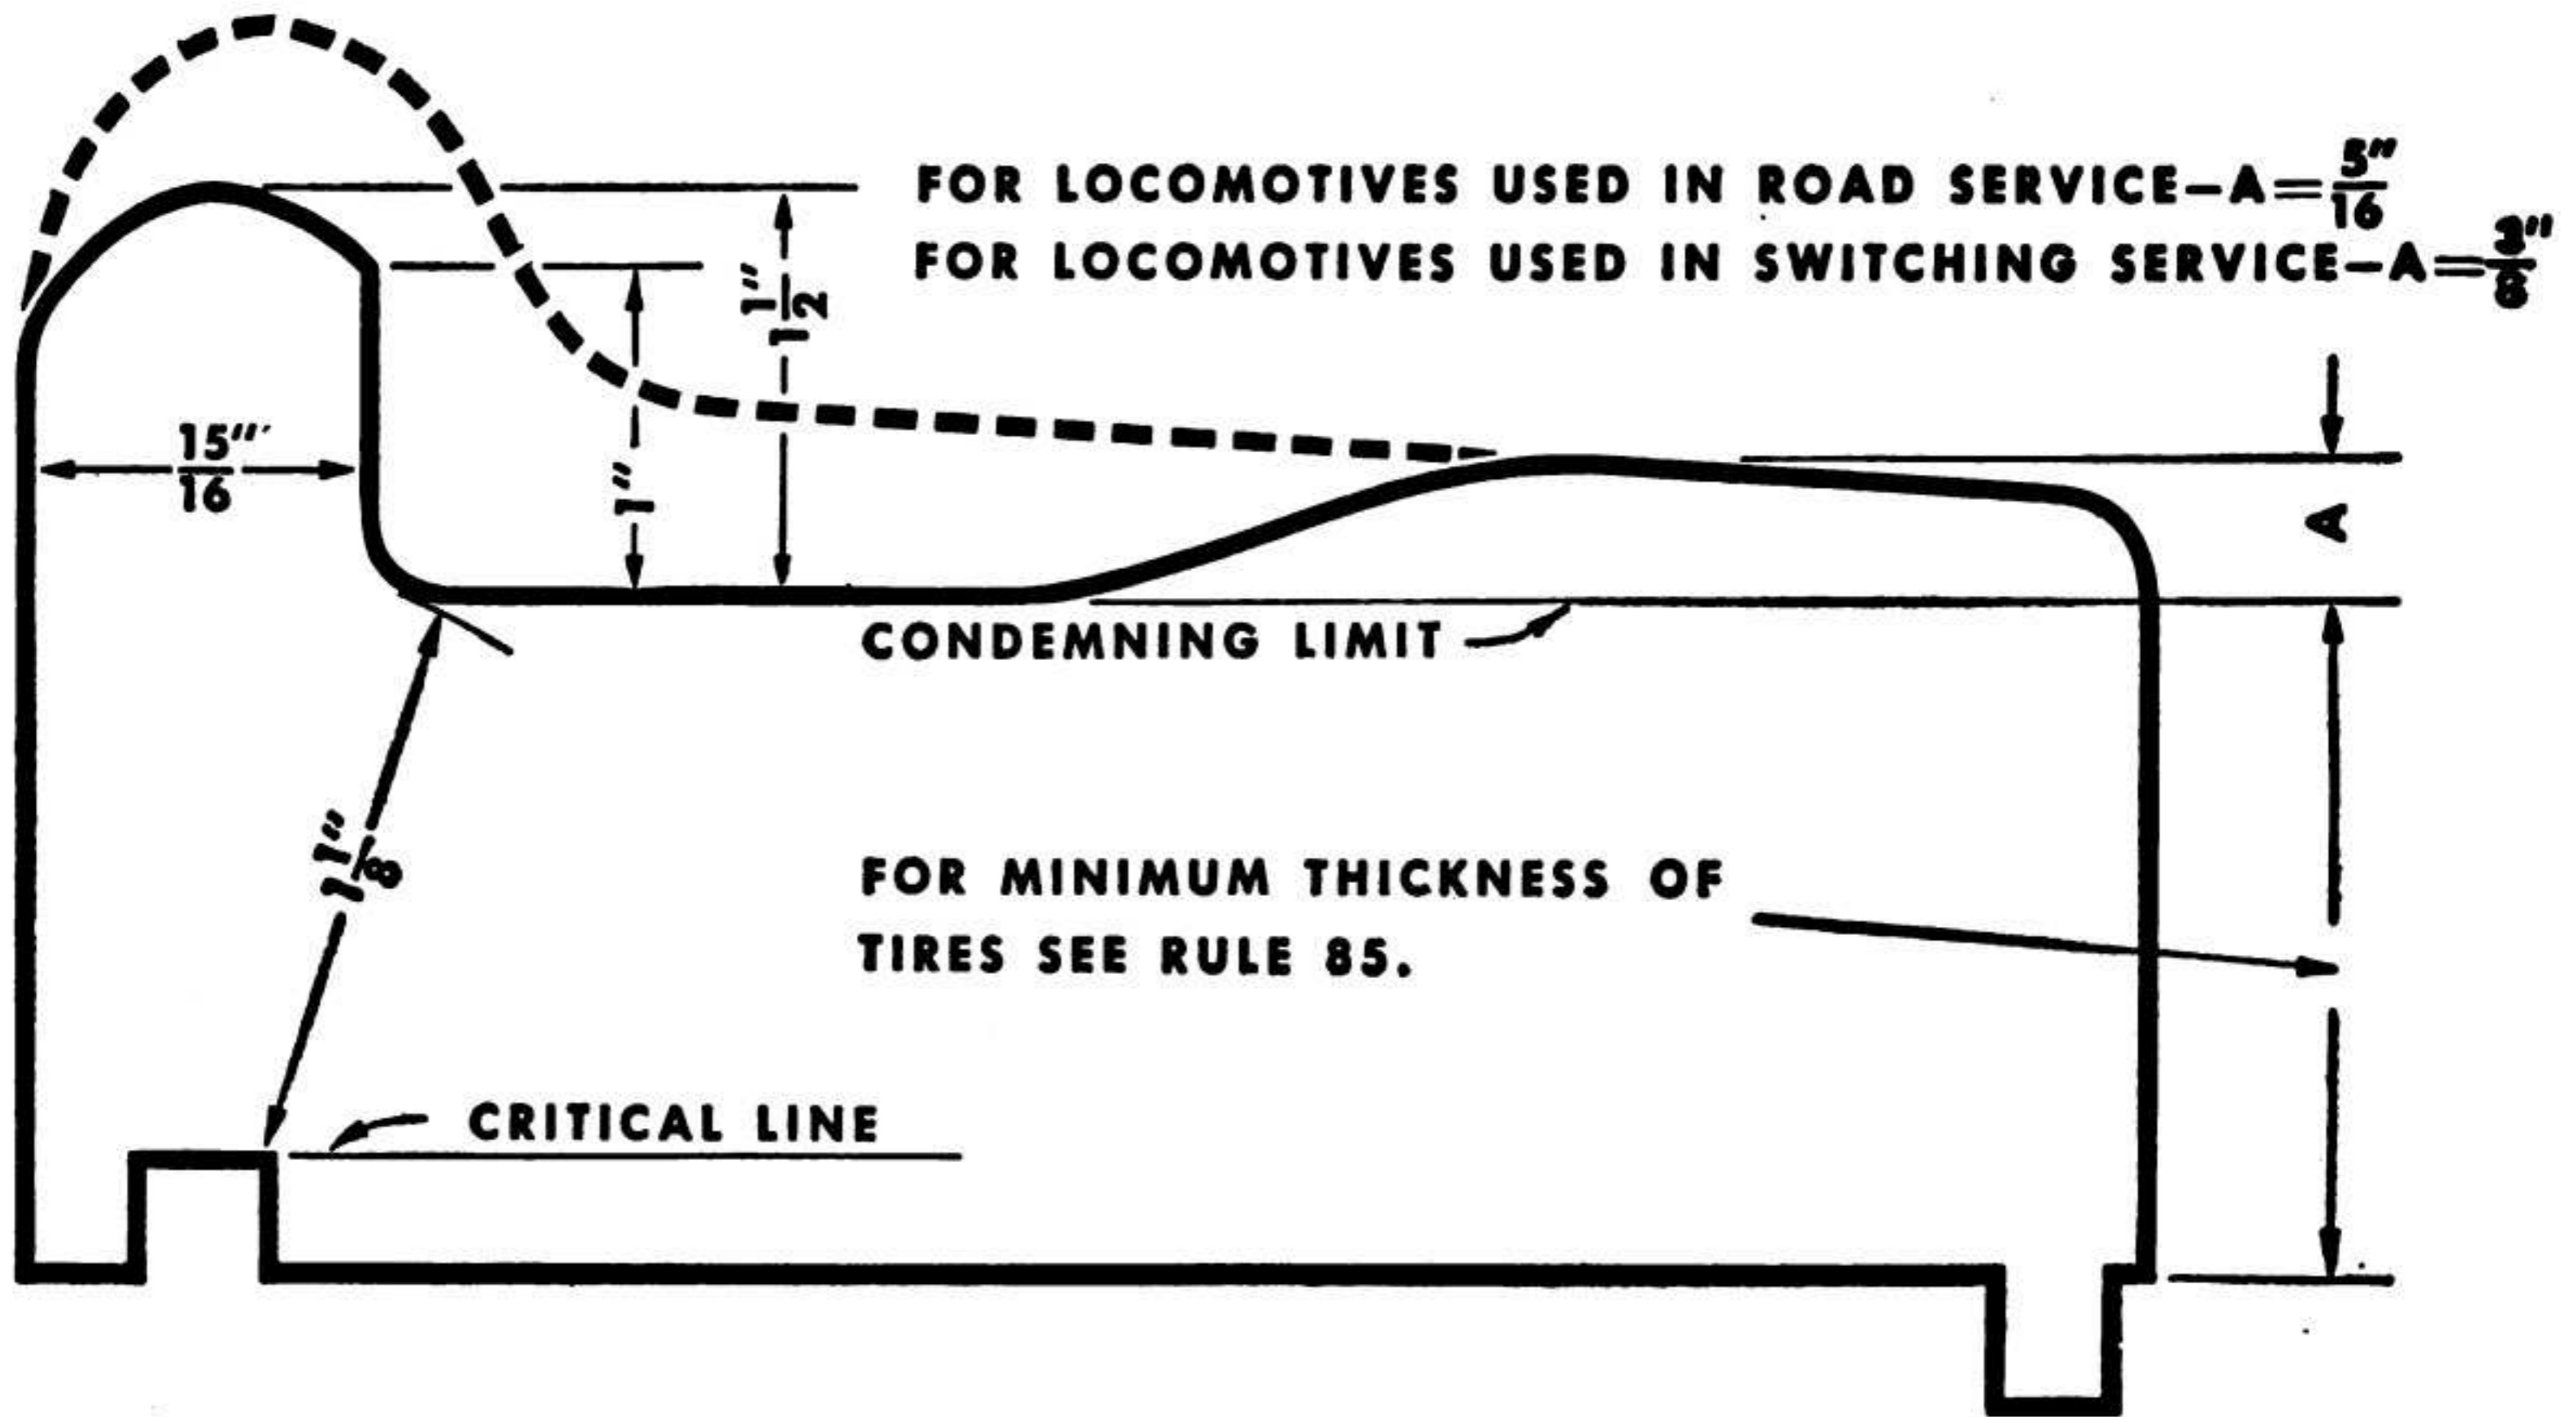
Steel tire shrinkage fastening with shoulder and retaining segments. Driving and trailing wheels.
